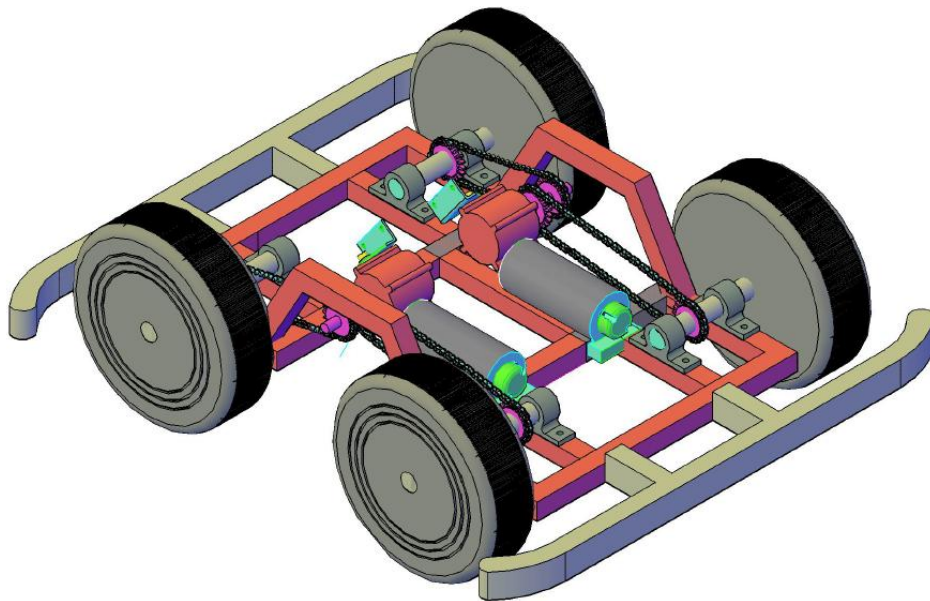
IMR Wheeled Robot – V2, inner chassis and motor and wheel assembly
